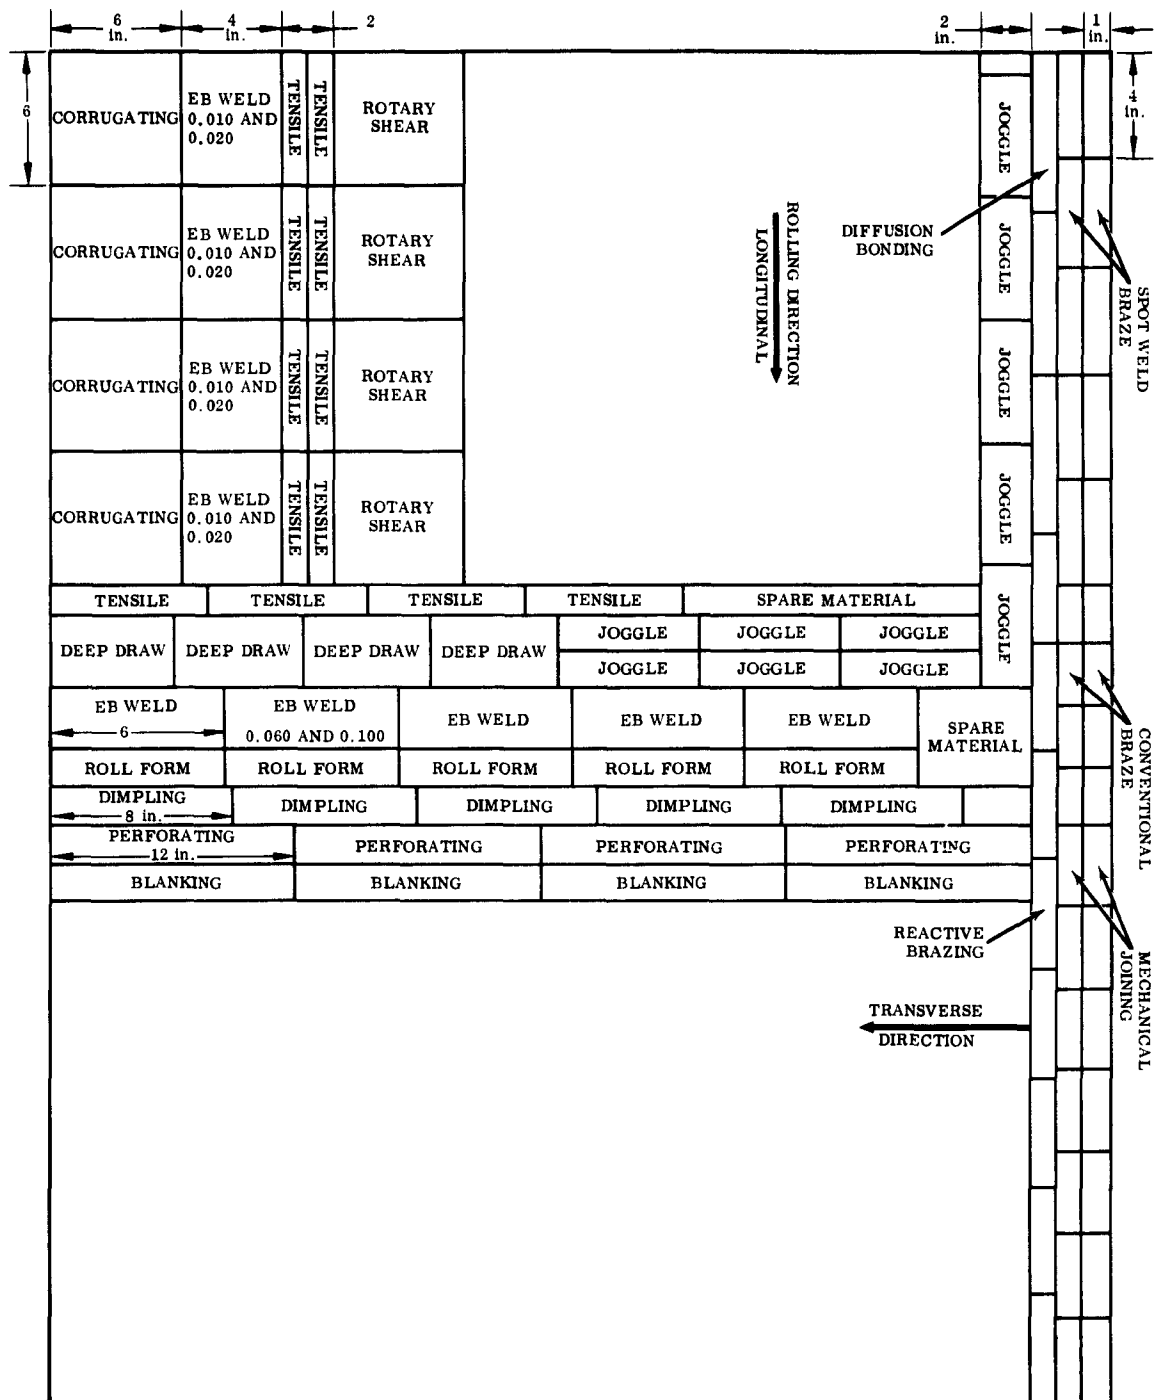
TUNGSTEN SHEET FORMABILITY SAMPLING PLAN
